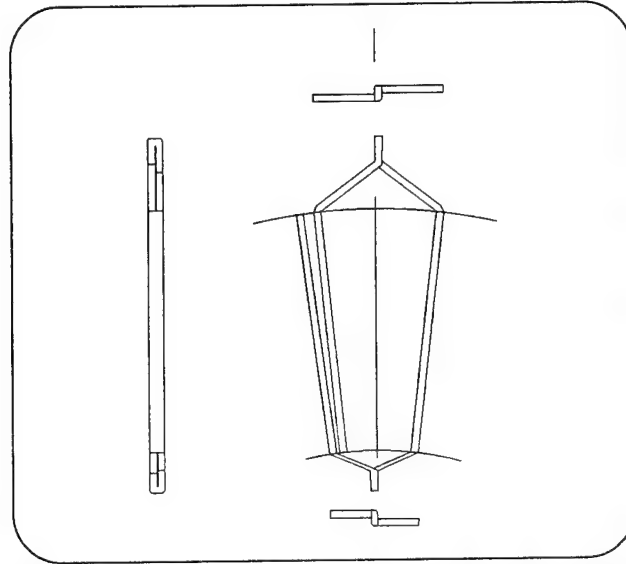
End Turn Geometry (Armature Winding Shown)
